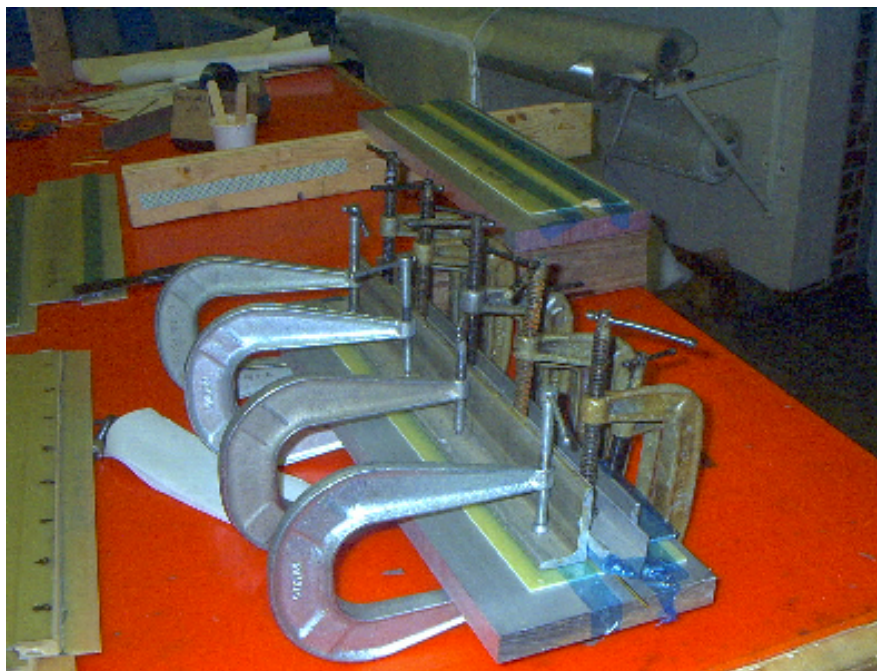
JOGGLE JOINT ADHESIVE PANEL FABRICATION
